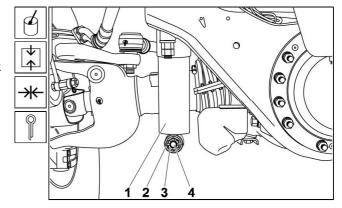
Lower attachment of the front suspension shock absorber - installation
